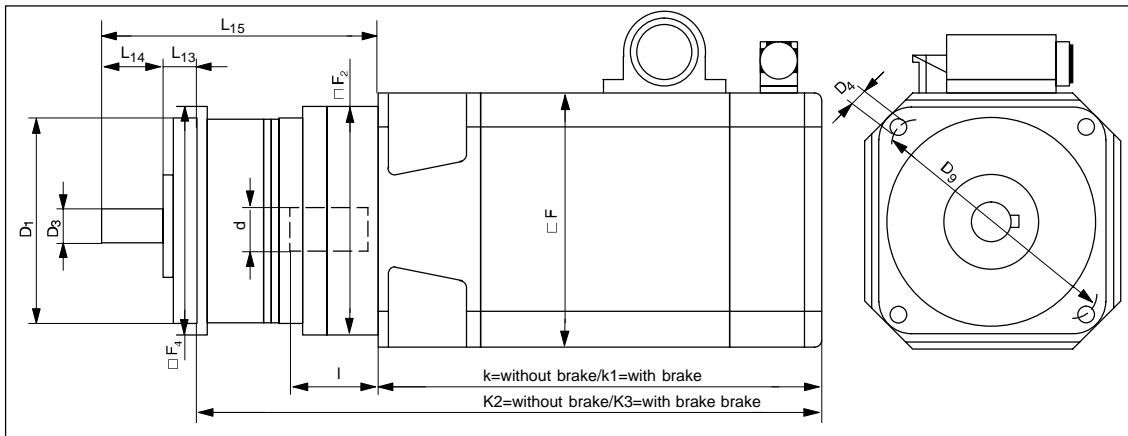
1FT6 motor with planetary gearbox (alpha Company) SPG 2-stage, dimensions in [mm]
